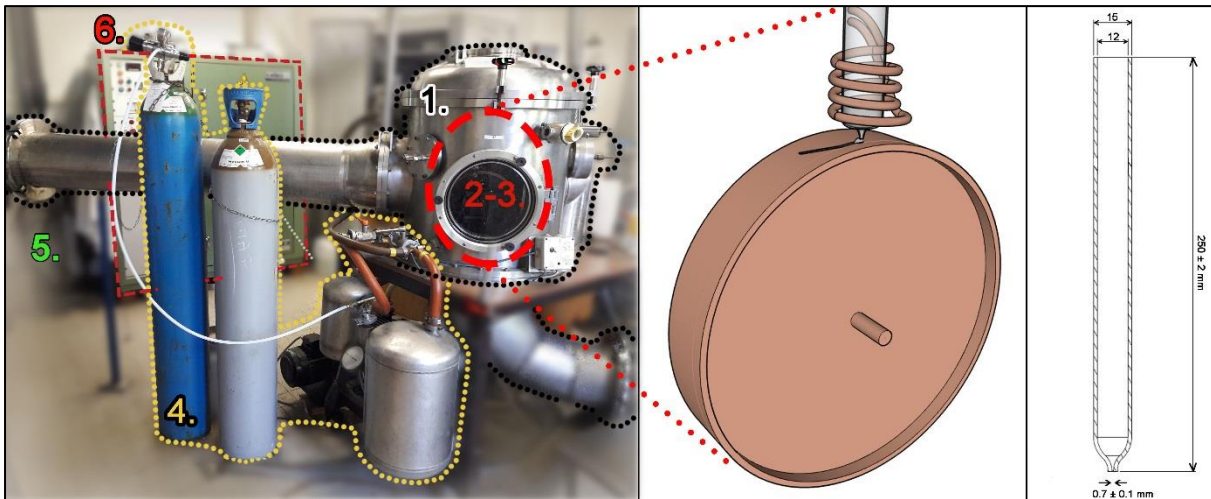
Melt-spinning setup with a magnified schematic view of the crucible- coil assembly and a geometry of a casting quartz tube.
